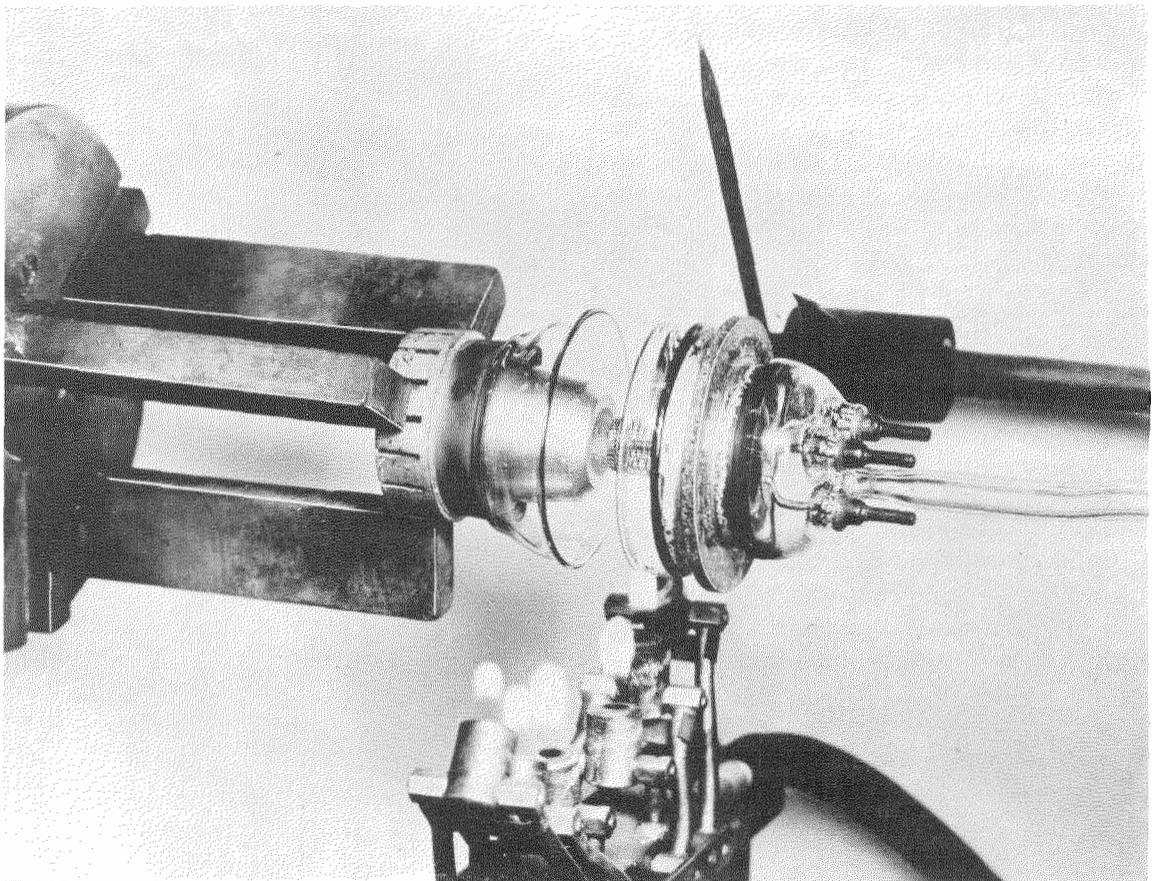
The glass-mounted anode, held by the jaws of the lathe chuck, and the filament-grid assembly are joined at the two glass surfaces.
